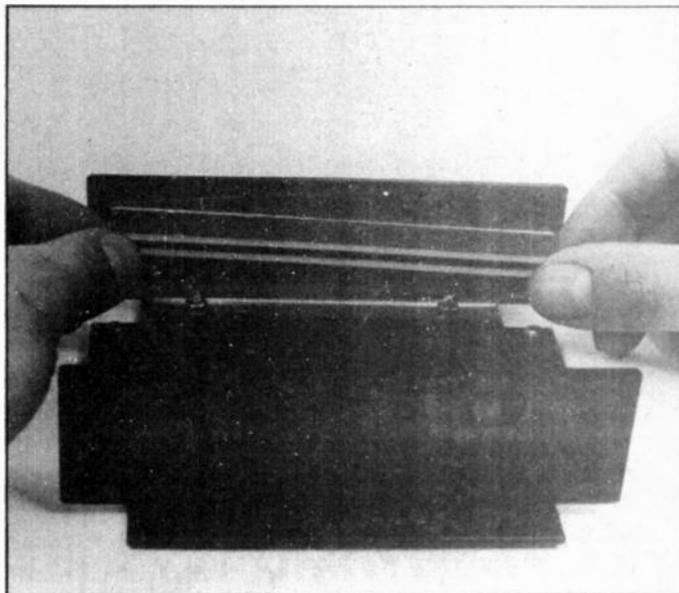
PCB guide-rails make an easy method of positioning and holding circuit boards
